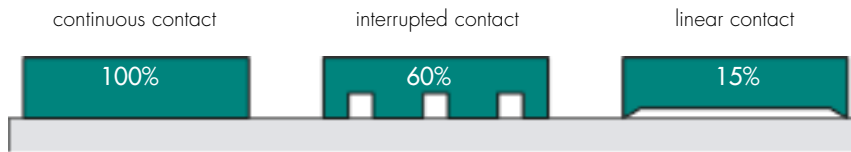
Rough illustration of holding force reduced by unfavourable workpiece shapes
